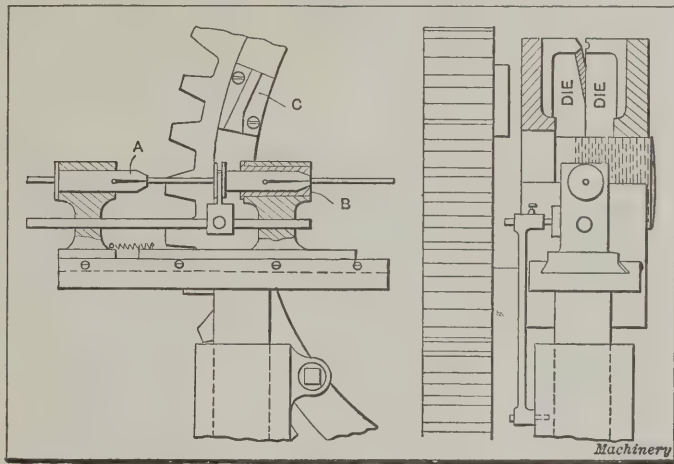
Diagrammatical Outline of the Main Features of the Ball Blank Rolling Machine
